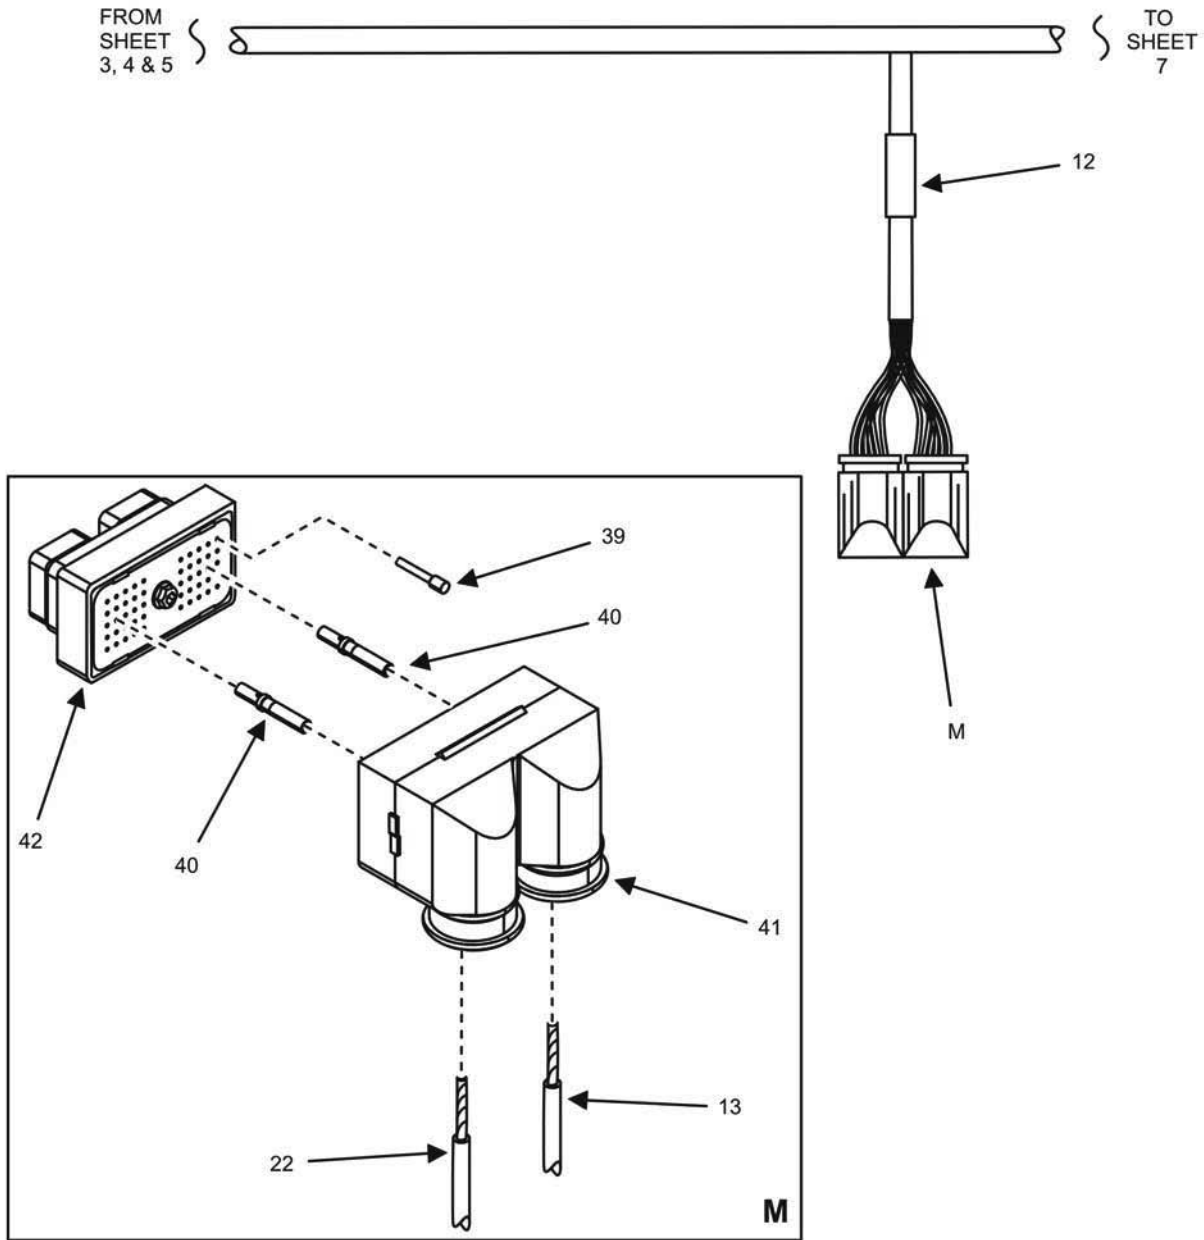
Engine Wiring Harness (Sheet 6 of 14).
